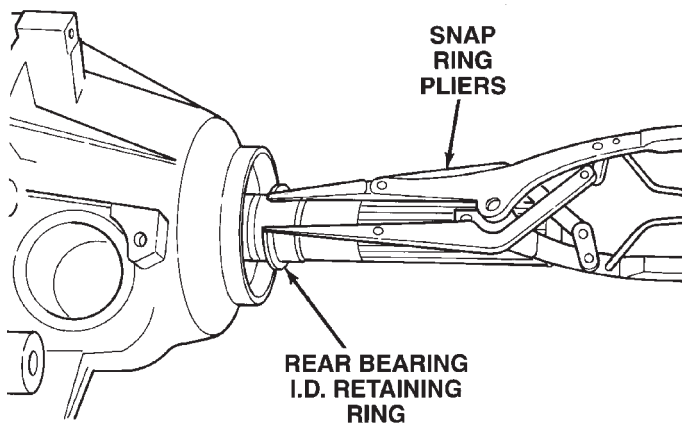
Rear Bearing I.D. Retaining Ring Removal
